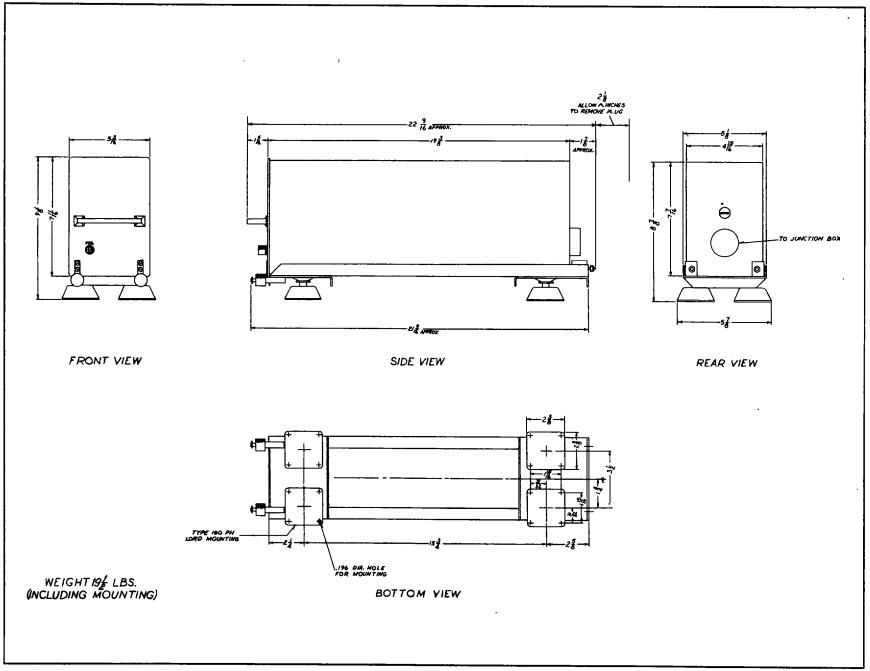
Rectifier PP-2/APQ-5-Outline Dimensions
